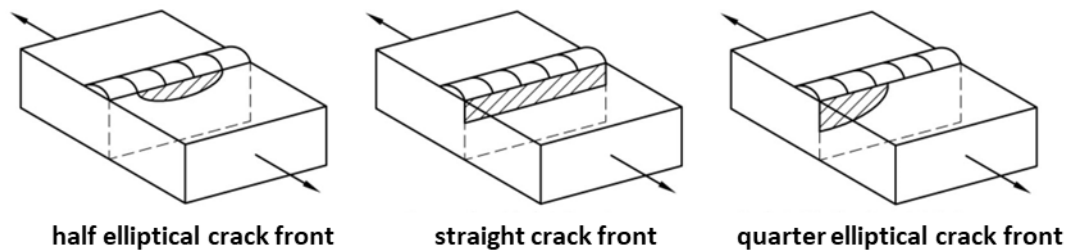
Different crack fronts in butt-welded joints [Fisc12]
